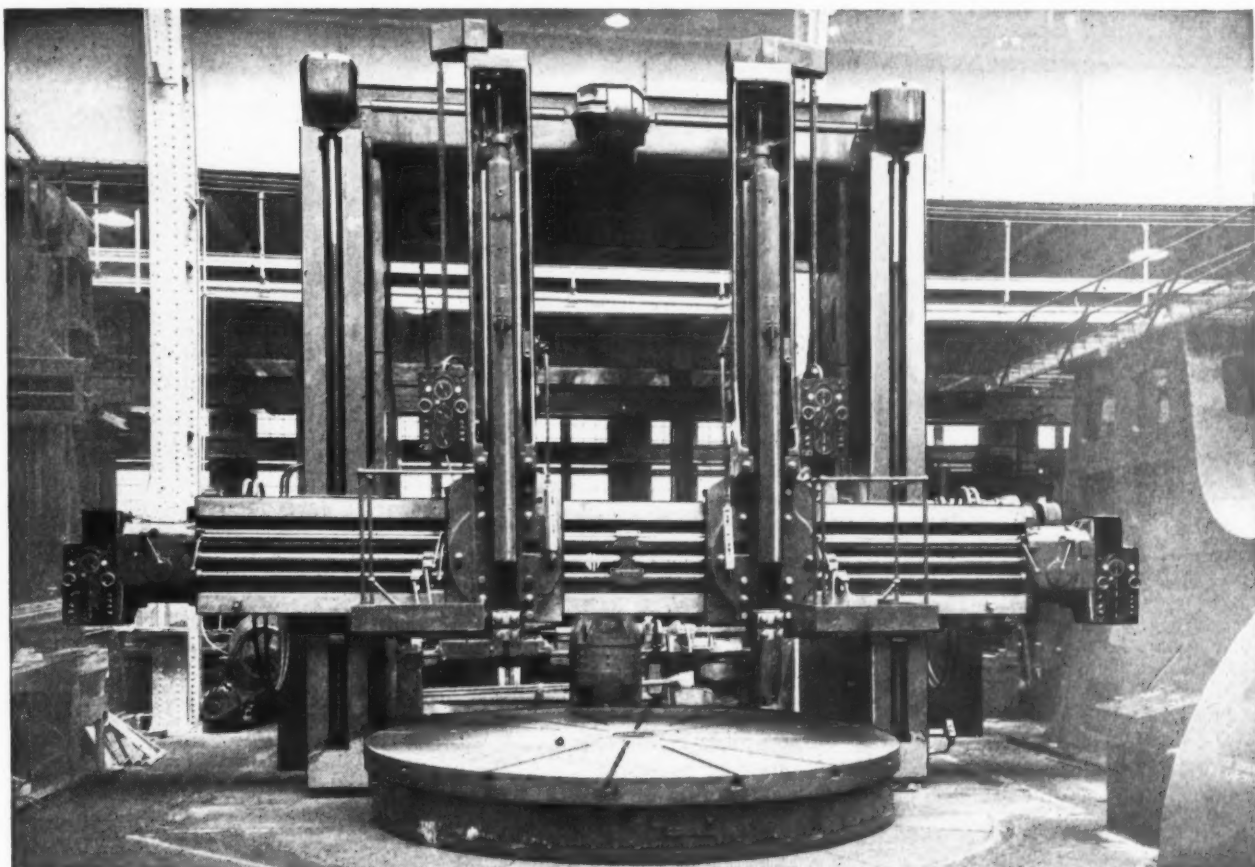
Boring Mill with 14-foot Table Arranged for Precision Control of Saddle and Ram through Mechanical-drive Dial Controls and Precision-cut Lead-screws
